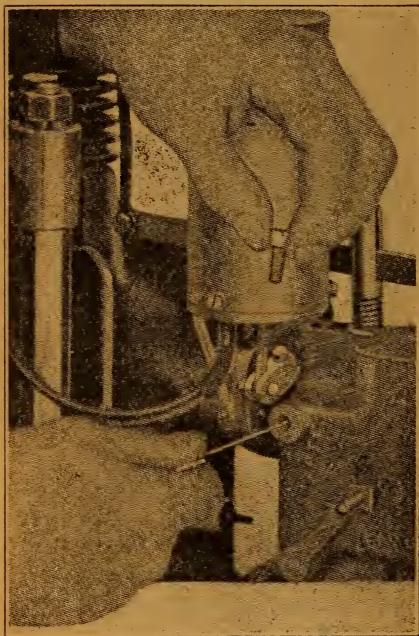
Showing how to clean spray nozzle in mixing valve.
